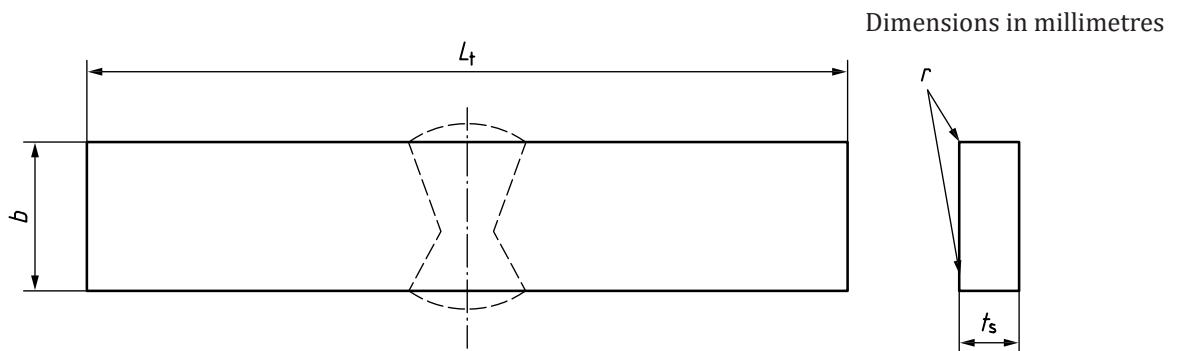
Transverse root bend test specimen for a butt weld (TRBB)
